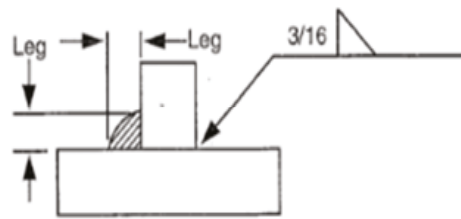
Basic Welding Symbols-AWS
